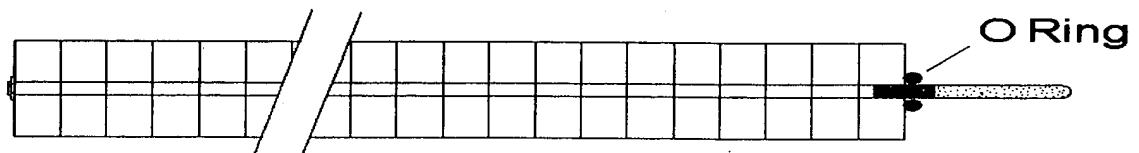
Remove 007 Viton retainer O-Ring from Load Rod. Install Pellets * until last one resides in "green" zone. Slip-on the 007 Viton retainer O-Ring against last Pellet to retain it in place on the Load Rod.
